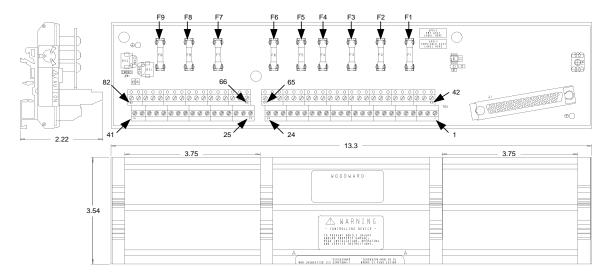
34Ch HDVIM FTM Outline Dimensions
